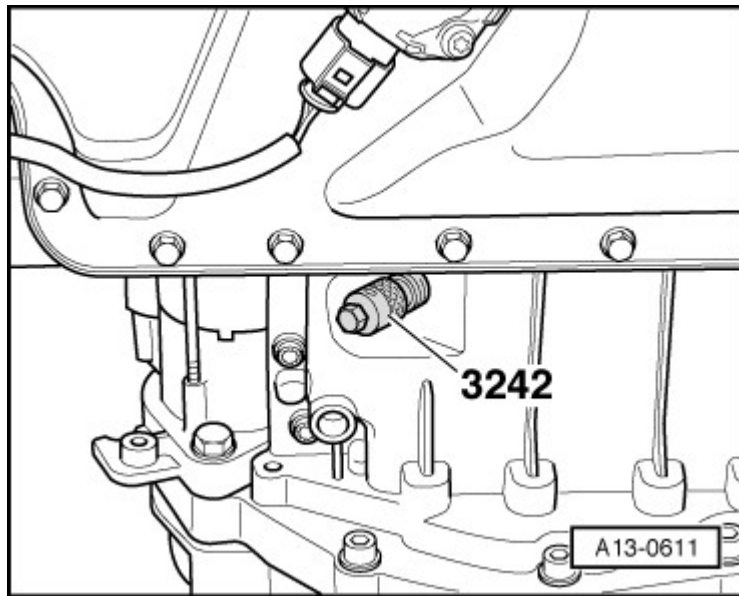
Removing/Installing Crankshaft Holder 3242 Into Hole
